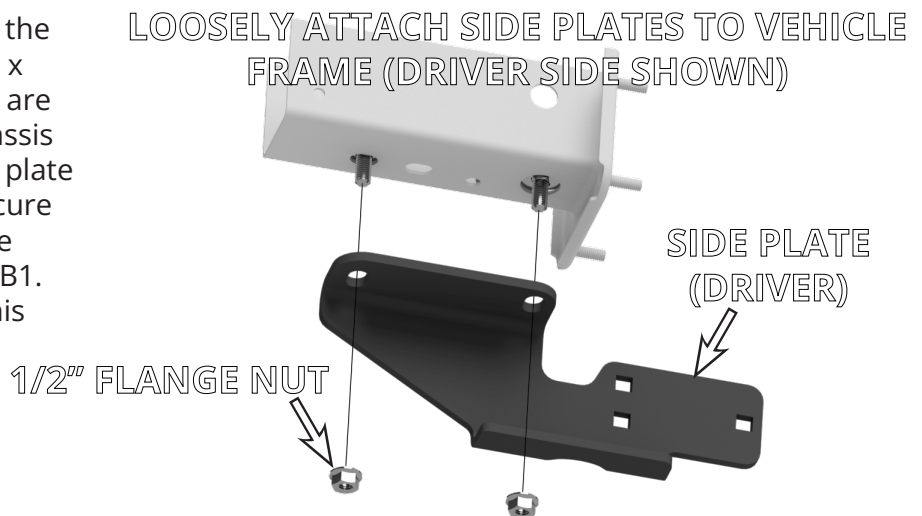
VIEW OF DRIVER SIDE PLATE INSTALL
